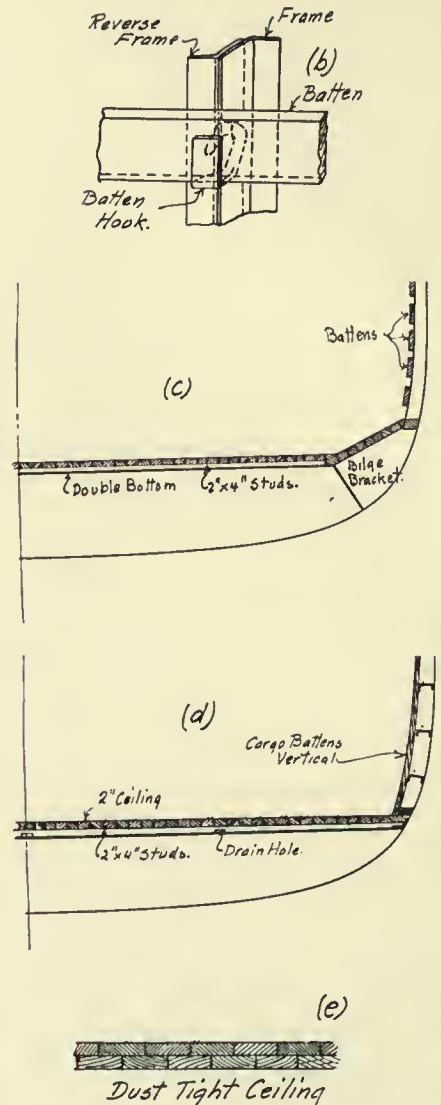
CONSTRUCTION OF CEILINGS AND DOUBLE BOTTOMS
